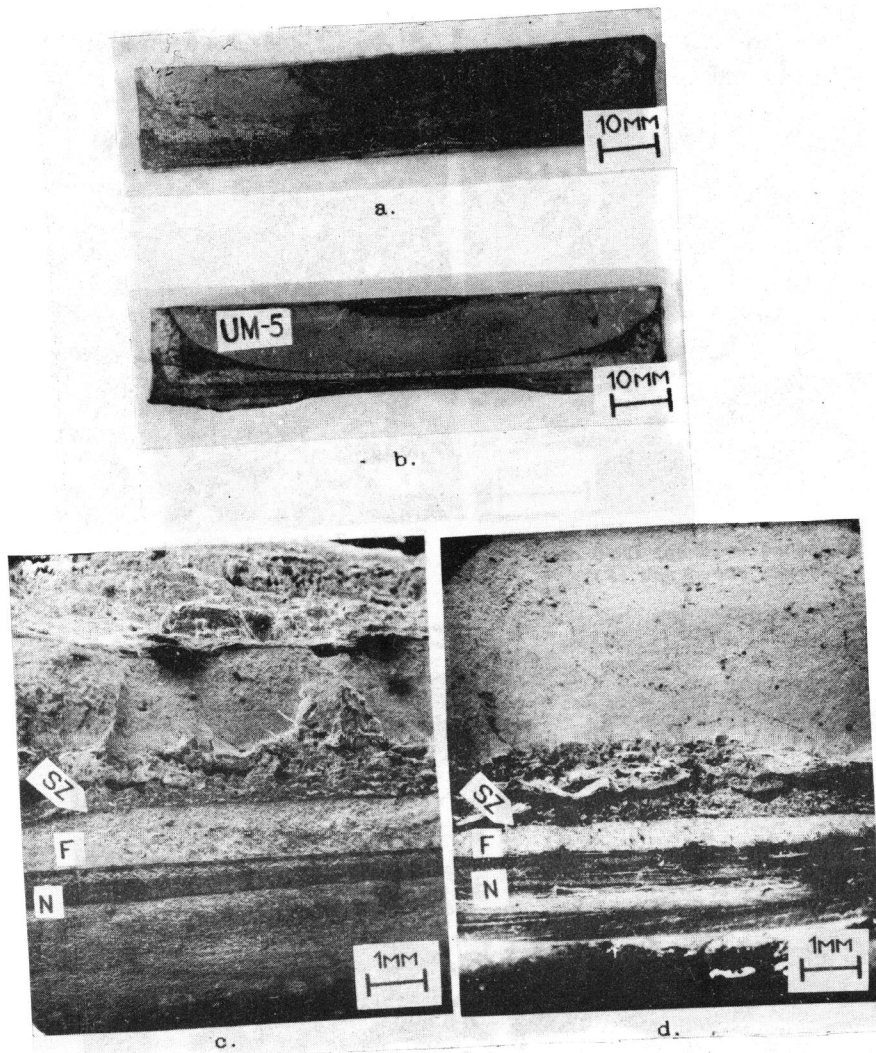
Surface cracks in tensile panels: a, c -large crack in overmatched weldment OM-6; b, d -small crack in undermatched weldment UM-5. (N -notch, F -fatigue pre-crack, SZ -stretch zone).
